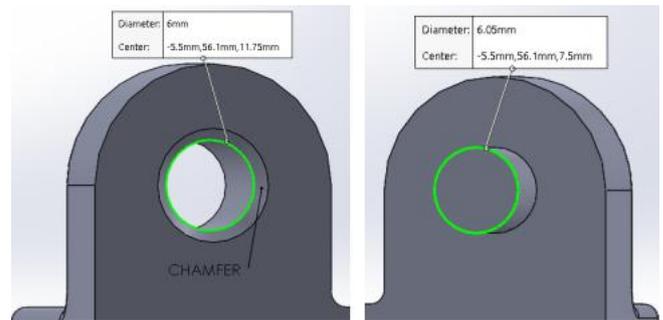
Dimensions of Female & Male Parts After Tolerancing
